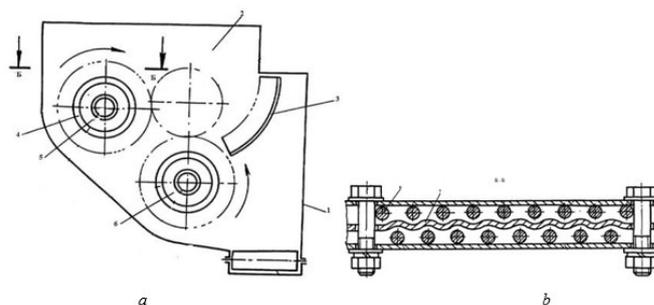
Arrangement of equipment for cleaning cucurbit crops: a – vertical section of the equipment; b: 1 – frame, 2 – hopper, 3 – retaining brush, 4 – hollow roll, 5,6 – drums, 7,8 – rope.
